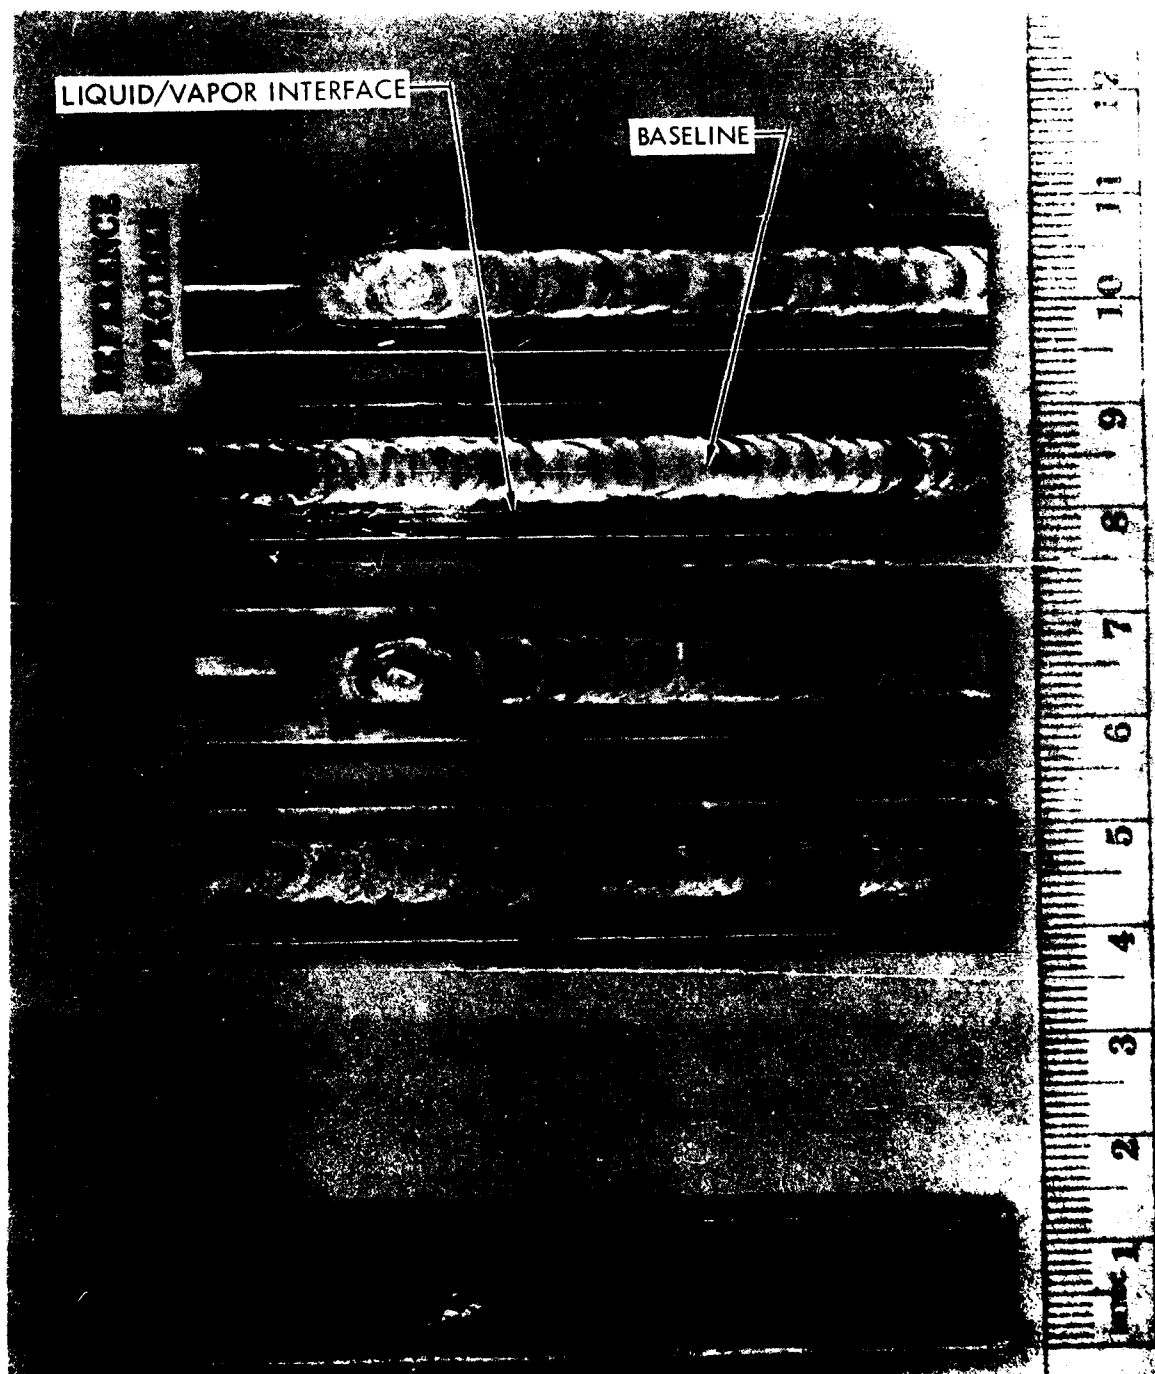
Aluminum Alloy Type 6061 -- Specimens: Posttest
